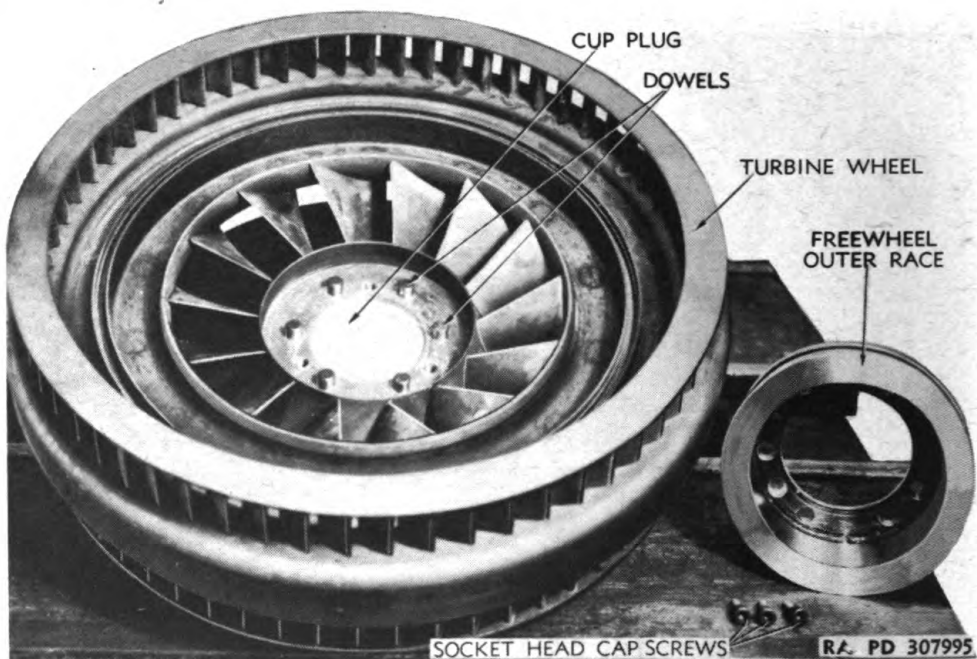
Cup Plug and Dowels Installed in Turbine Wheel
